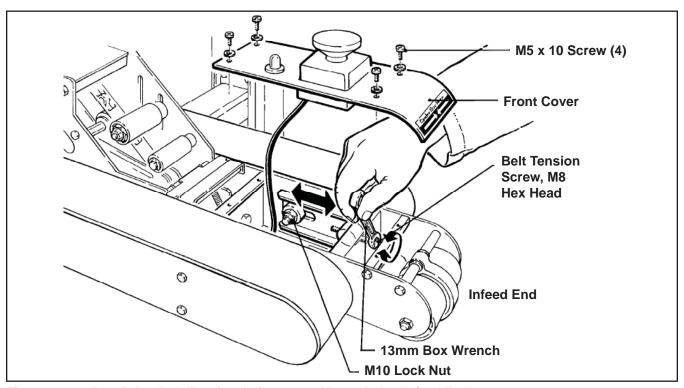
Box Drive Belt Tension Adjustment, Upper Belts (Infeed End)
